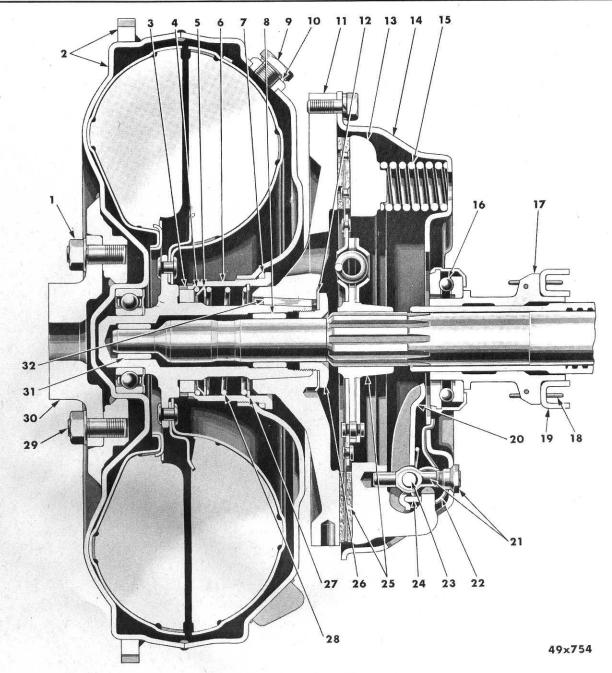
Typical Clutch and Fluid Drive with Housing Type Seal (Cross-Sectional View)
